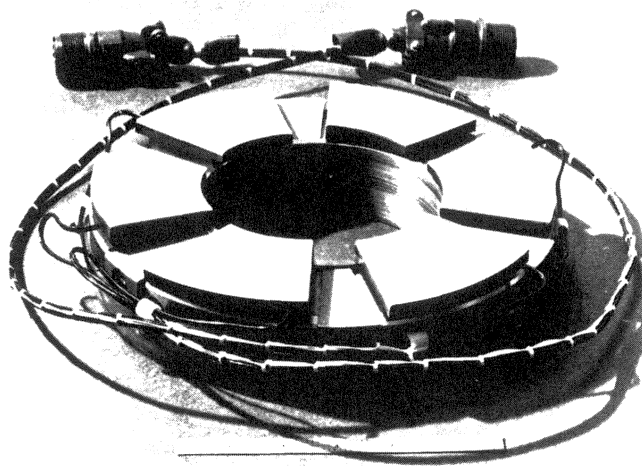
Oil Lubricated Tilting-Pad Equalized Thrust Bearing for Steam Turbine Operating at 10,000 rpm. (designed and built by Abramovitz Associates, Inc.)
